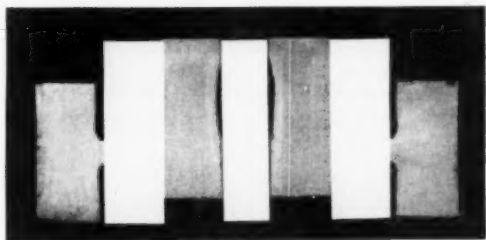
Etched half of sample casting. Edges of white cardboard are straight and parallel. Note surface "sink" which occurred in cored hole in hub and also at the base of fillets where the web joins the flange.
